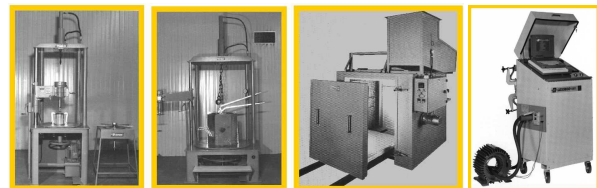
Recommended winding stripping-out methods: (a) End-winding cutting machine (*Thumm* technique); (b) Winding pull-out machine (*Thumm* technique); (c) Oven to heat the windings. If burning-out process were performed with temperatures on average above 360°C the core losses will increase significantly. That limit depends on the type of core and the size of the motor. It is important to note that the temperature of the core is normally higher than the programmed in the oven.
